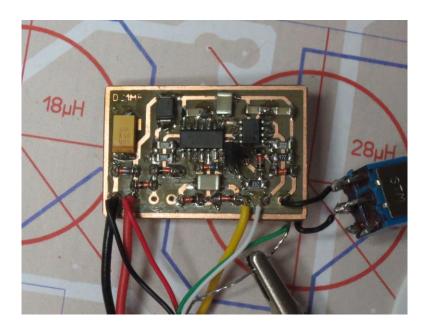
Prototype PWM plug-in module here still without DC / DC converter with charging diode
